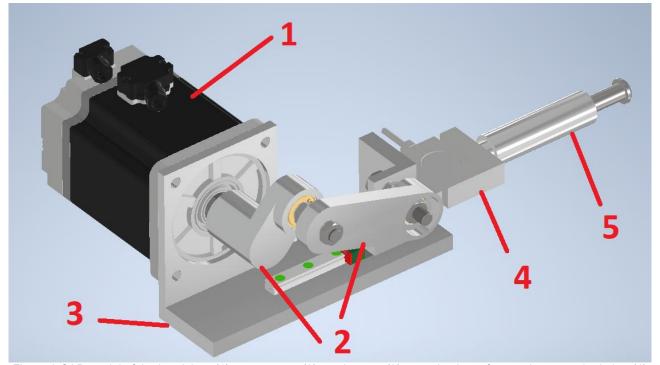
CAD model of the burnisher: (1) servo motor, (2) crank arms, (3) mounting base for attachment to the lathe, (4) EMS110 force sensor, and (5) burnishing head with a spring inside
